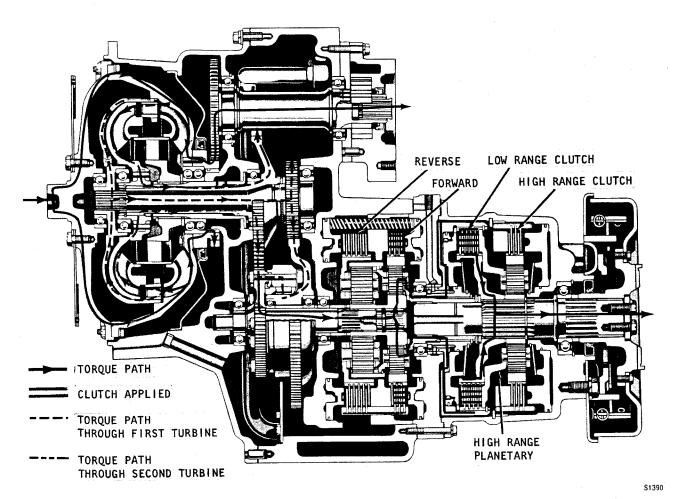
Forward-1 torque path (TRT 2221-3, TRT 2421-3 overdrive transmission)
